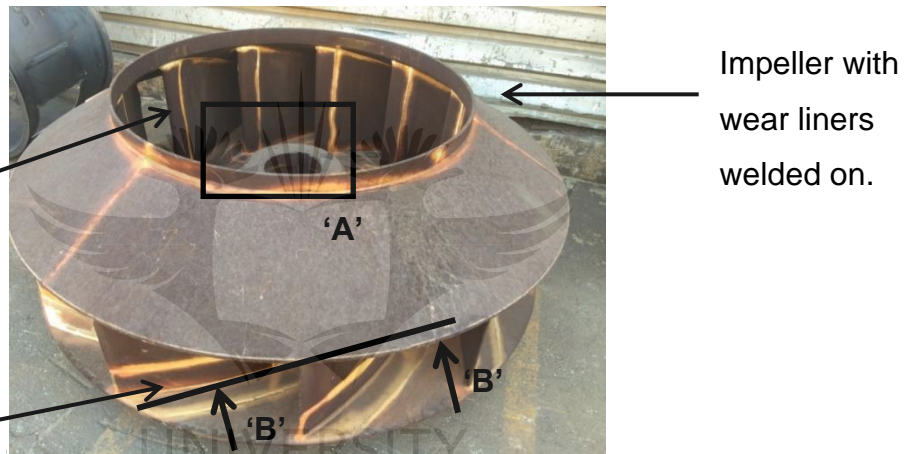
4: Centrifugal impeller showing welded wear liners.
